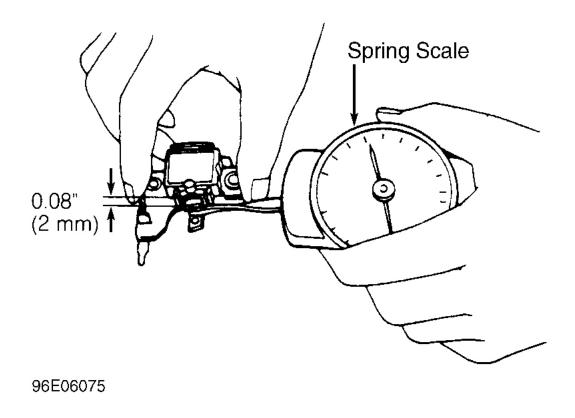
Measuring Brush Spring Tension Courtesy of MAZDA MOTORS CORP.
